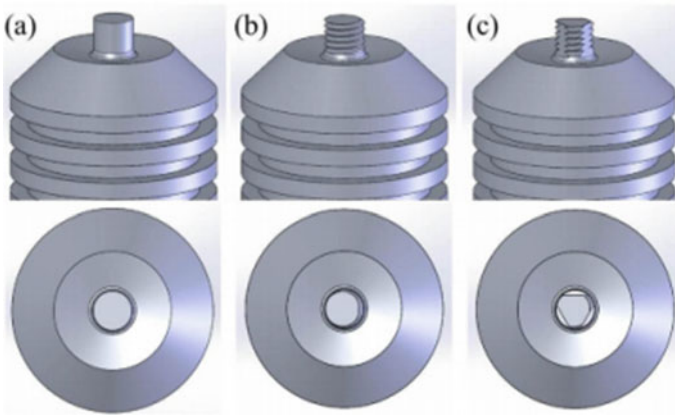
FSW tool pin features a cylindrical b threaded c threaded with the flutes [13]
